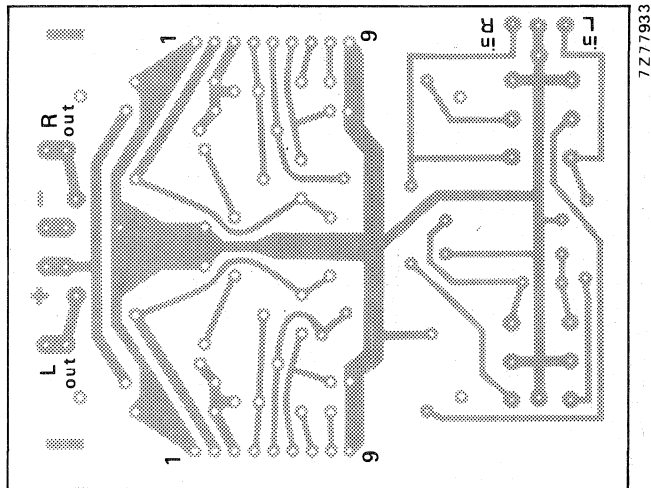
Track side of printed-circuit board used for the circuit of Fig. 12; p.c. board dimensions 83 mm x 65 mm.
